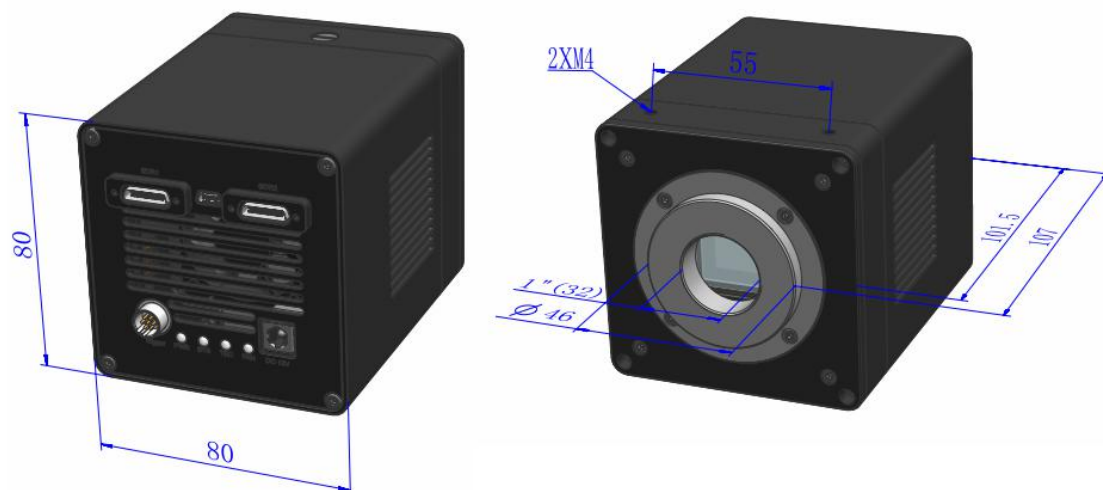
3 sMAX04BM-CL100 dimensions (mm)
